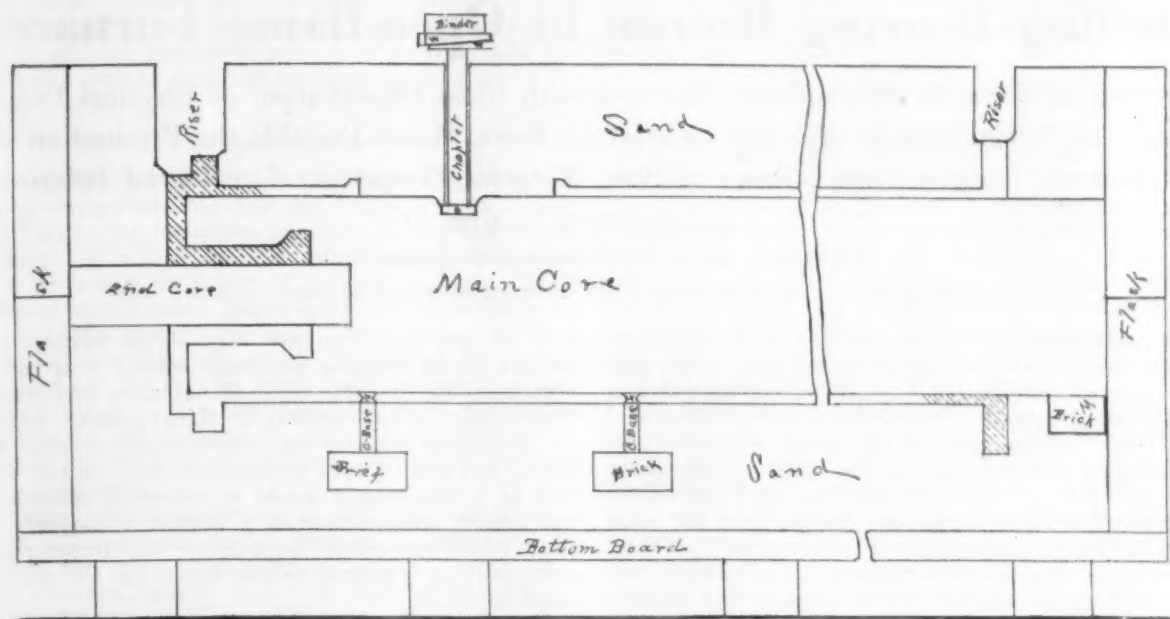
Mold Section. X—Chaplets: O—Piece of Flat File; W—Wedges
